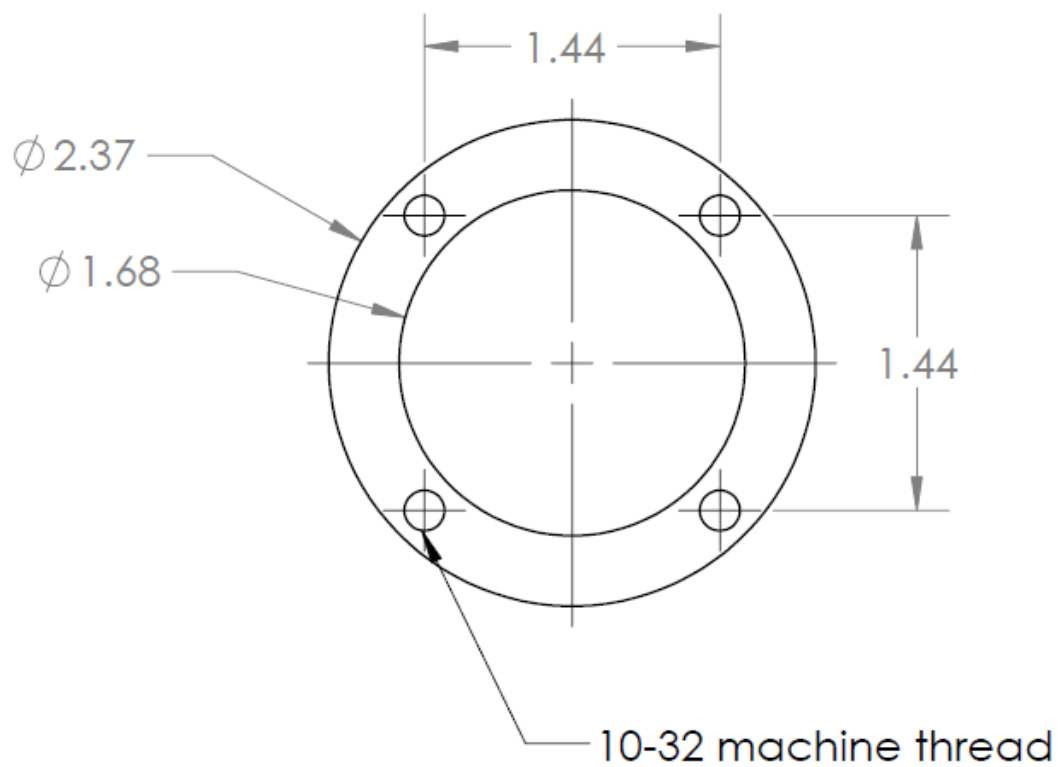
Back view of the probe stabilizer. All dimensions are in inches.
